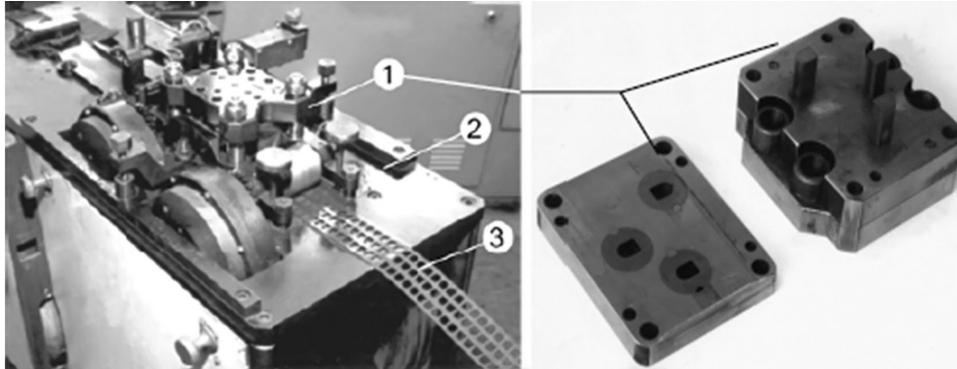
Durability testing in the blanking of grooves into a steel sheet using three-row die, reinforced with alloys under investigation (1 – die, 2 – mechanical press, 3 – sheet steel band).
